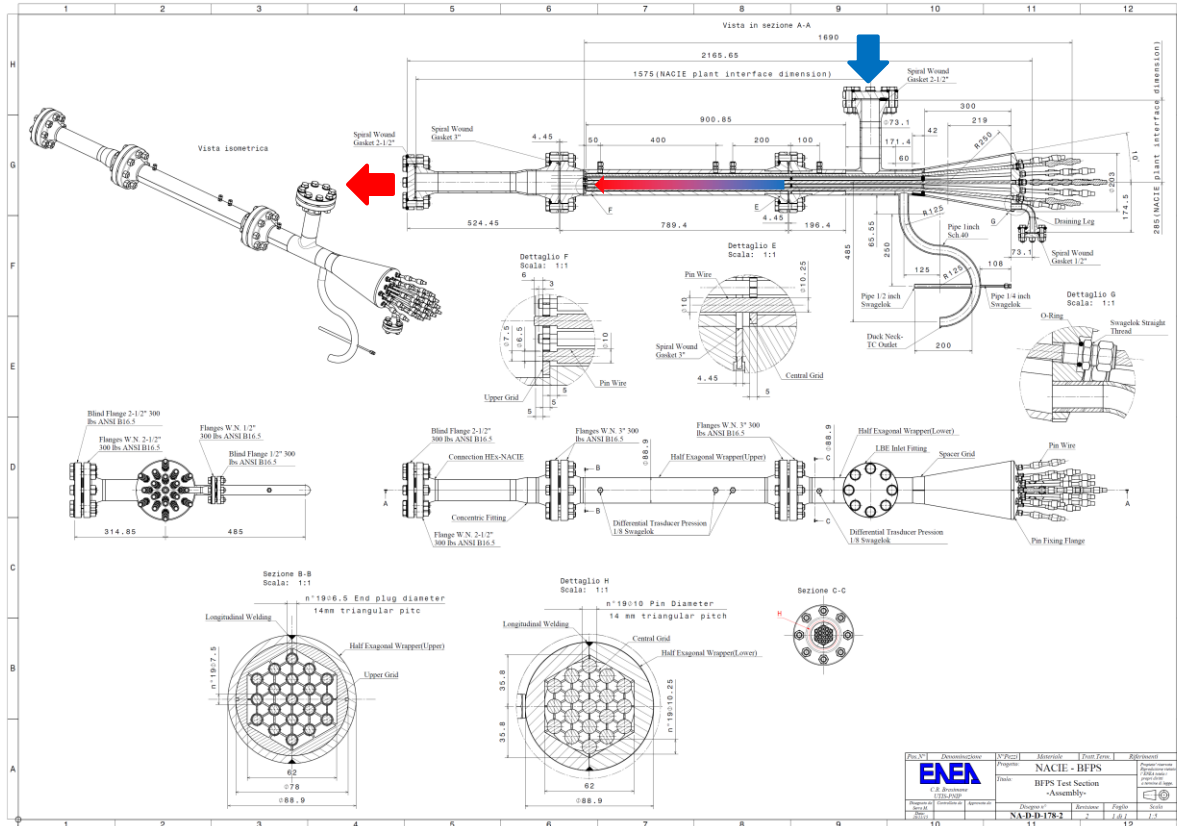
Preliminary mechanical drawing of the BFPS test section.
